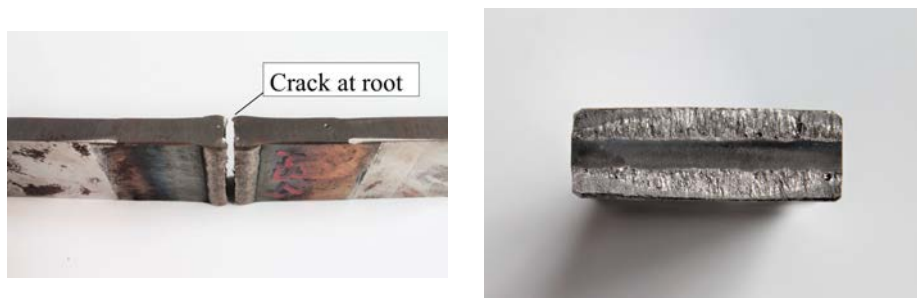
Fracture surfaces of partial-penetration butt-joints: specimen A3-4, as welded, axial loading, $R=0.05$, $\Delta\sigma = 270MPa$, $N_f = 67315cycles$
